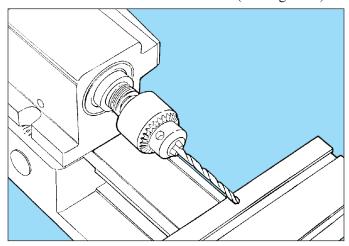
Headstock drilling. The drill turns in the headstock spindle while the work is held stationary.
